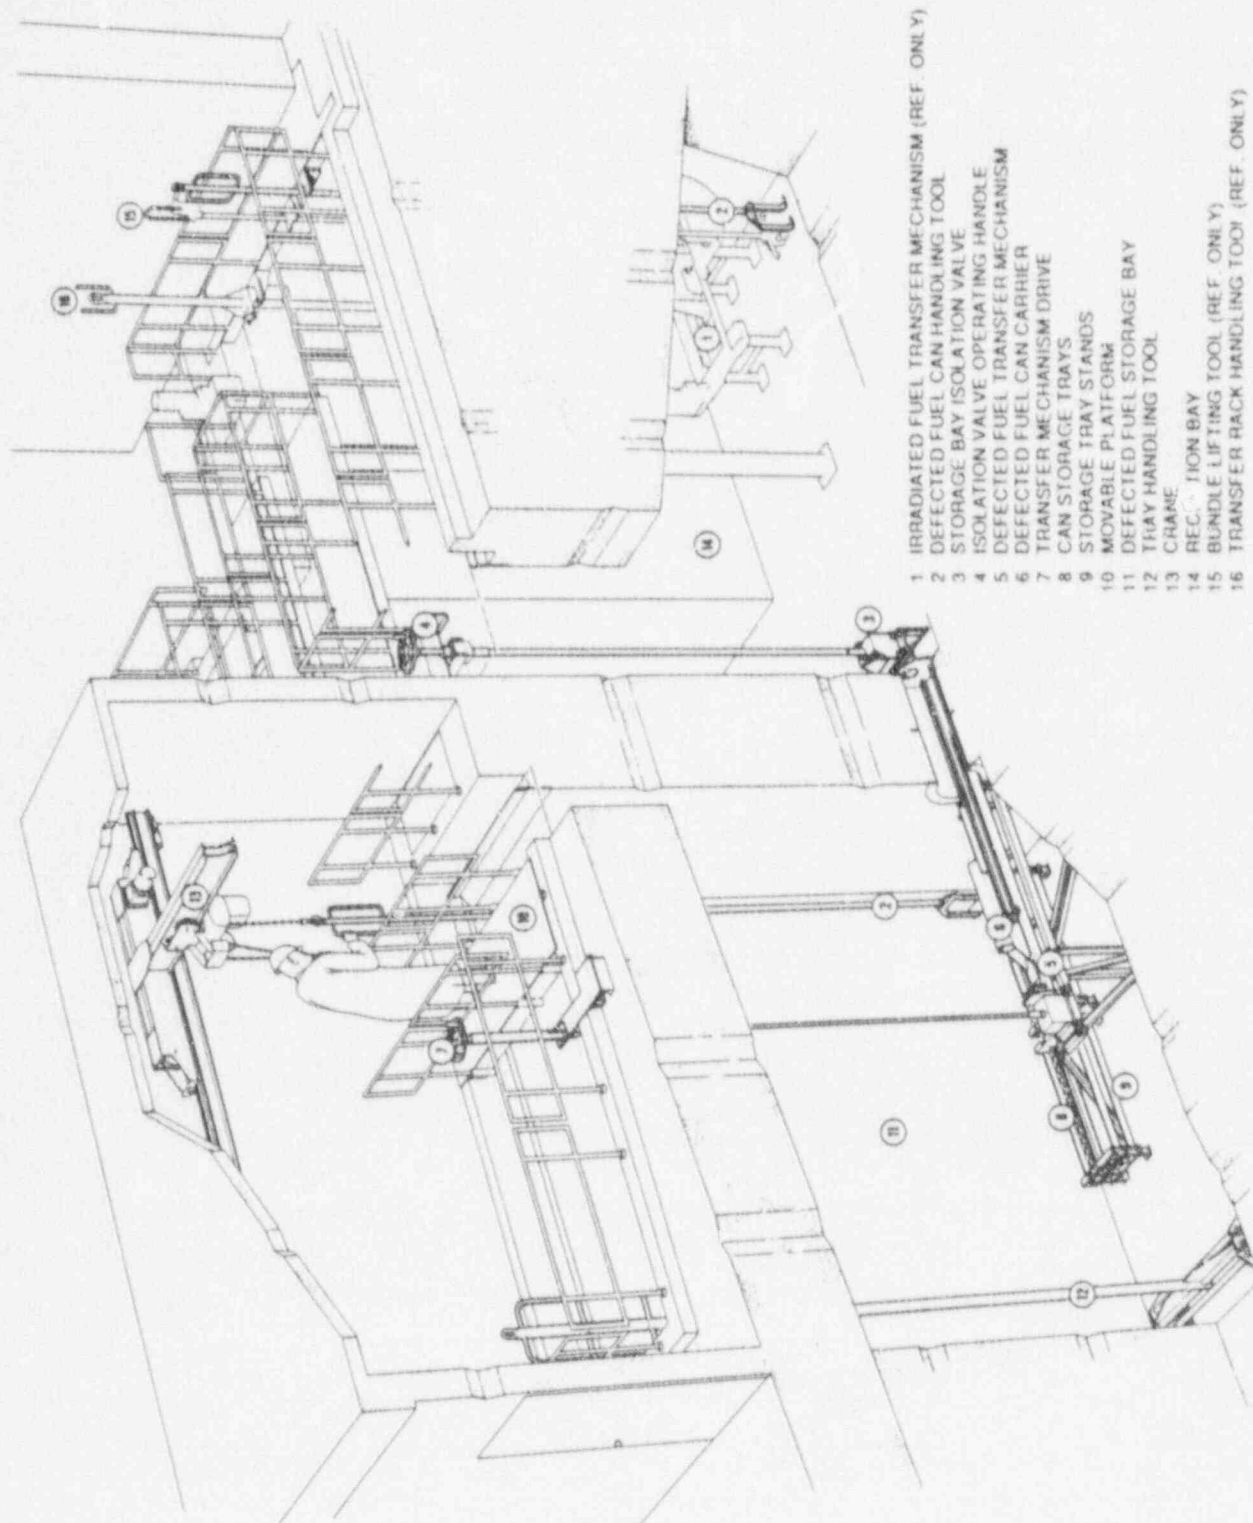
DEFECTED FUEL HANDLING EQUIPMENT
